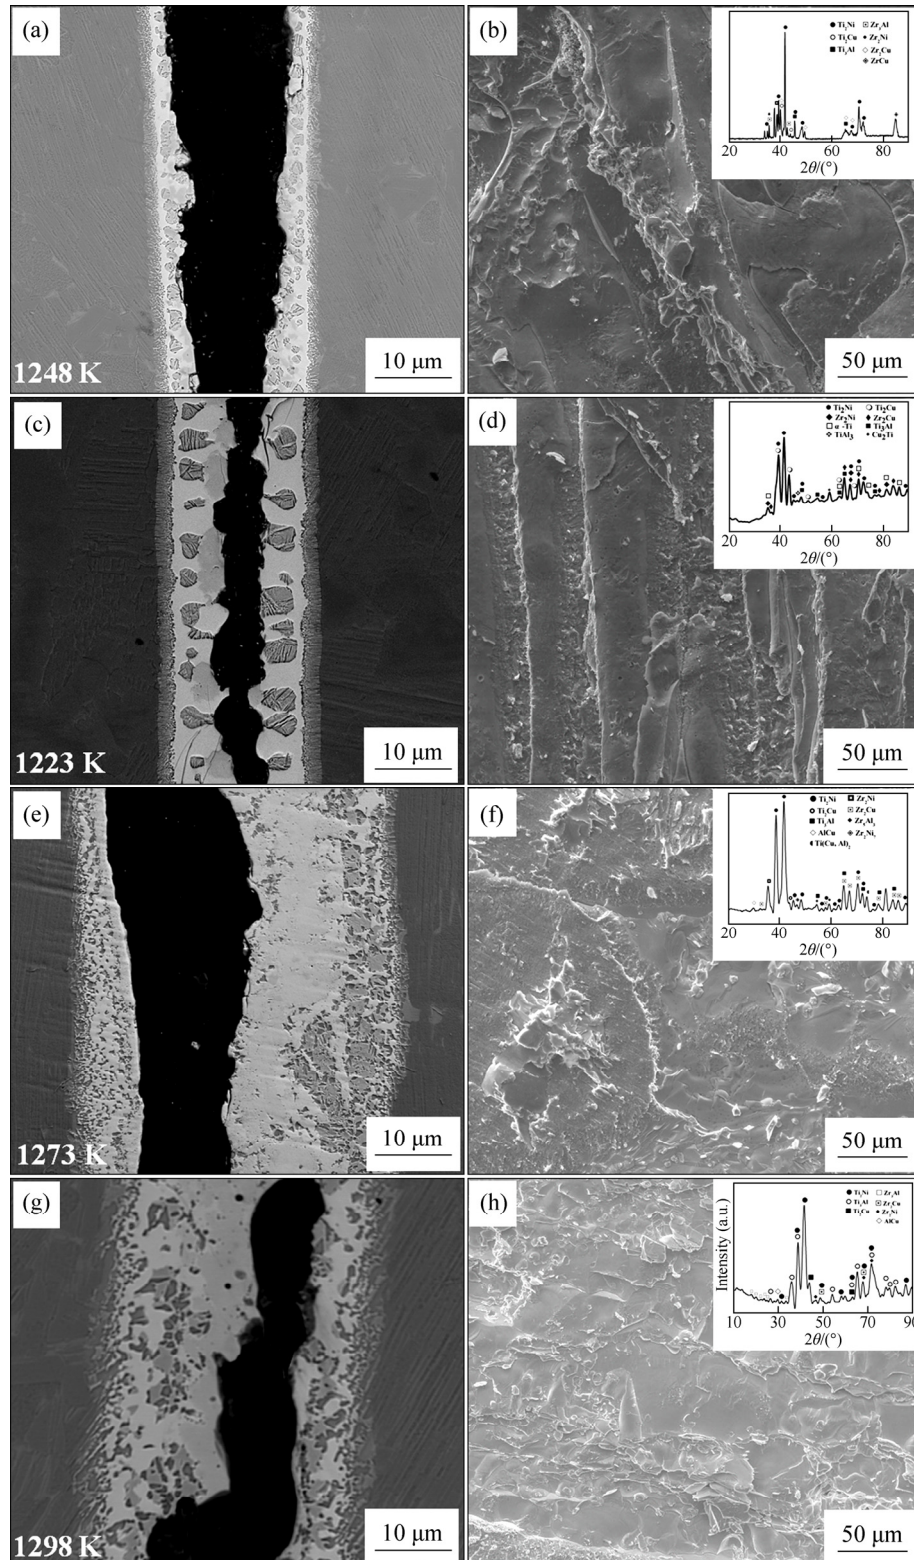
Typical fracture paths and fracture morphologies of TiAl joints brazed with crystalline filler alloy (a, b, e, f) and amorphous filler alloy (c, d, g, h)
